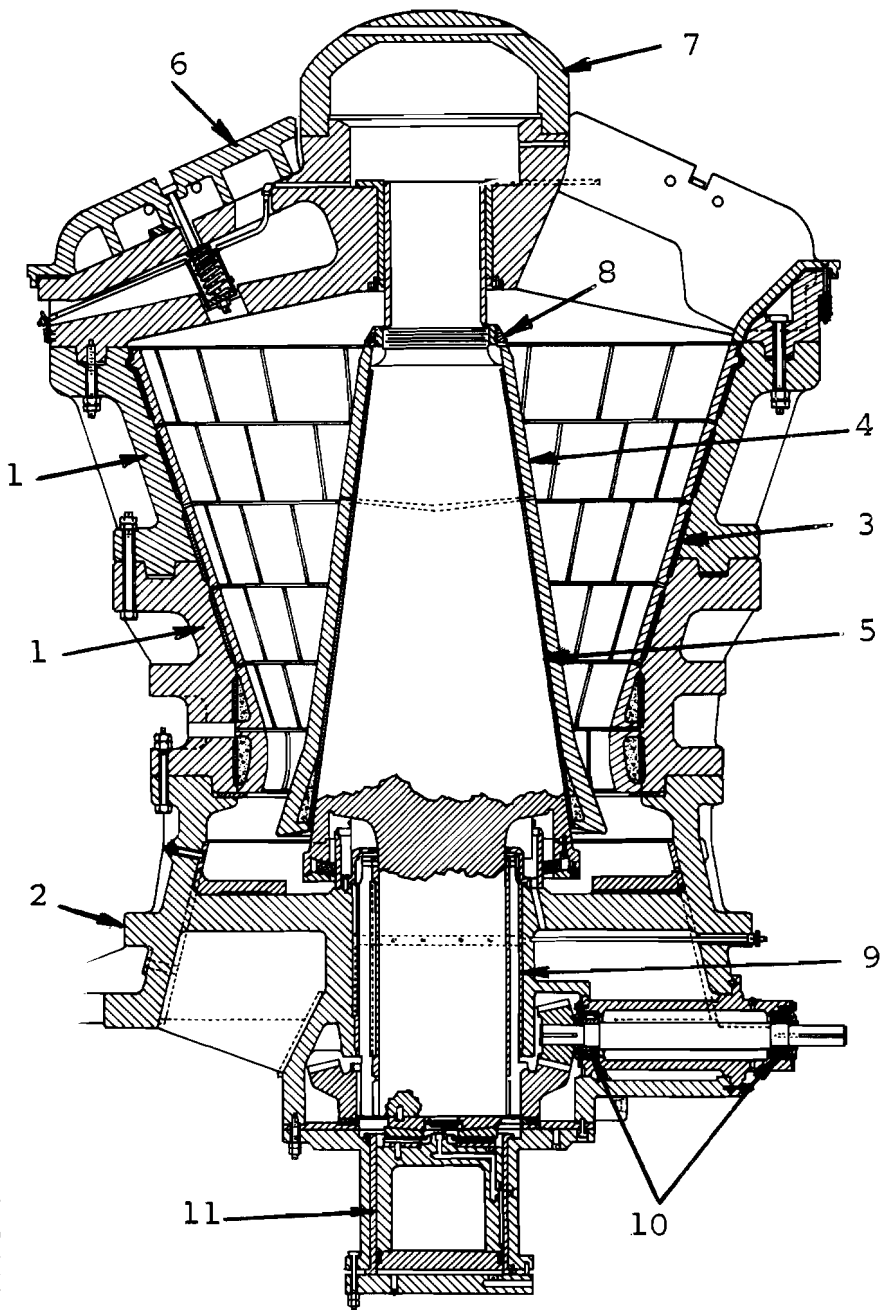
Sectional view of hydraulic-supported short-shaft gyratory crusher (courtesy of Allis-Chalmers). Legend: (1) top shell (large crushers have two-piece top shells), (2) bottom shell, (3) concaves, (4) mantle, (5) main shaft, (6) spider, (7) spider cap, (8) two-piece head nut, (9) eccentric, (10) pinion-shaft bearings, (11) hydraulic-support piston.
